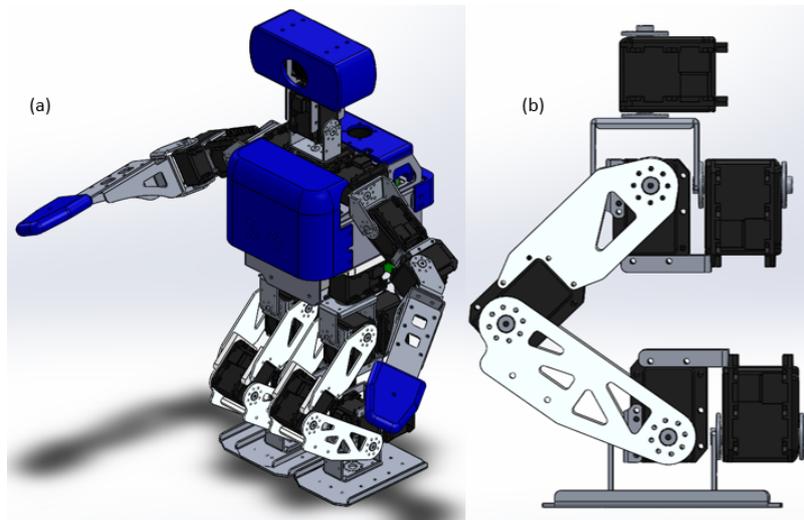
a) Chape assembly. b) Chape's leg assembly.
